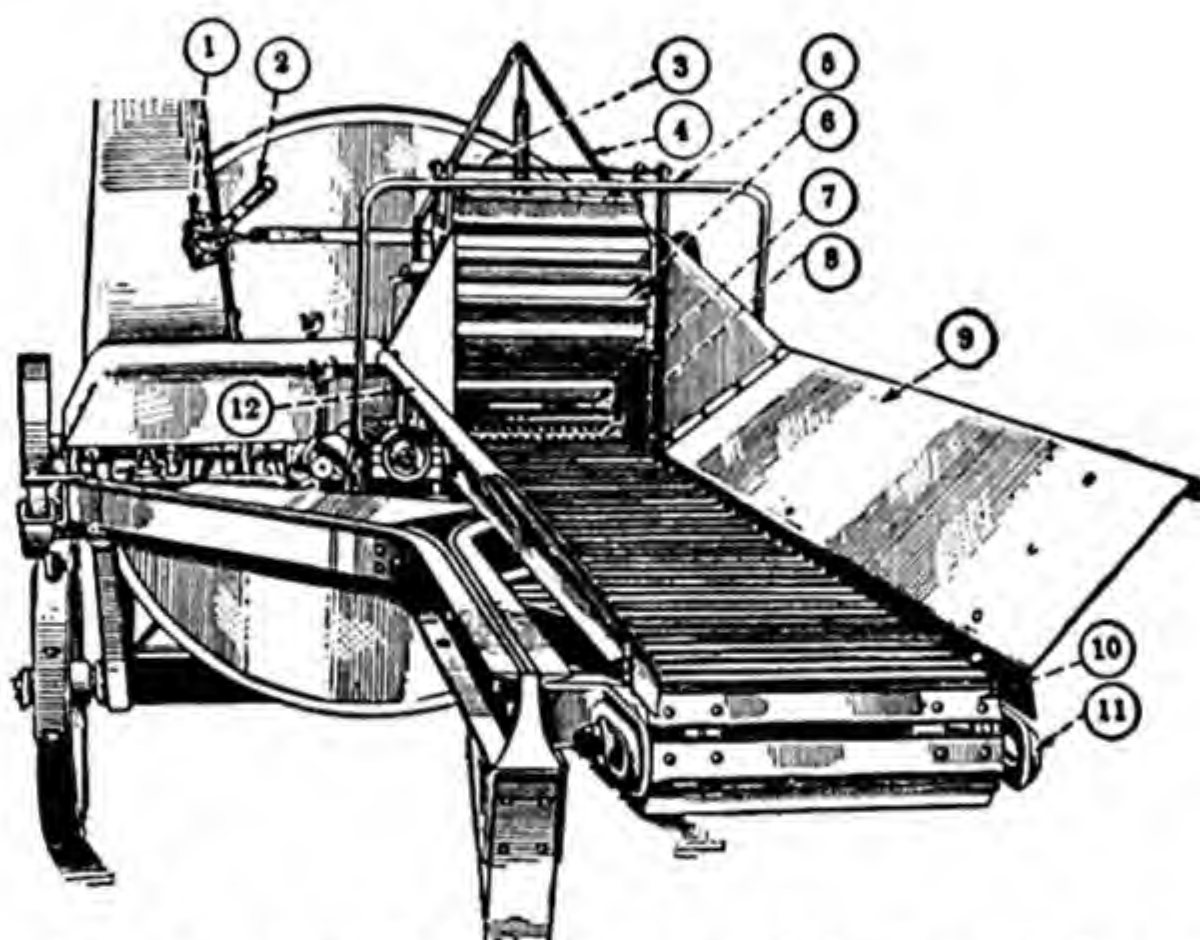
Carrier apron and feed rolls: 1, 2, lock for cover; 3, fan cover; 4, spring yoke; 5, clutch and control lever; 6, paddle feed roll; 7, upper feed roll; 8, lower feed roll; 9, table side; 10, carrier slat; 11, adjustment for carrier tension.
